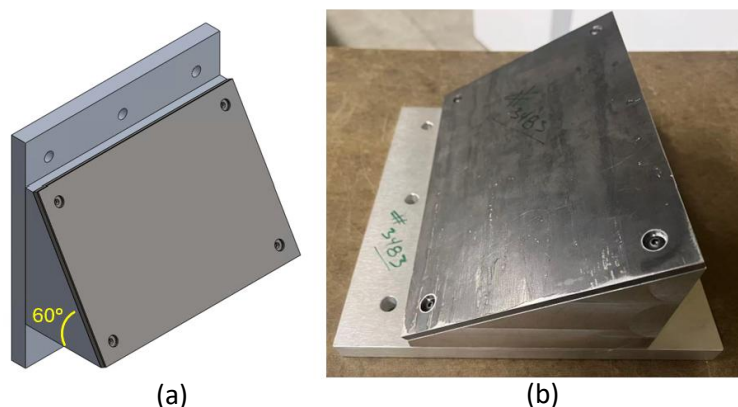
CAD model of the angled fixture developed in SolidWorks (a) and the corresponding manufactured fixture (b).
